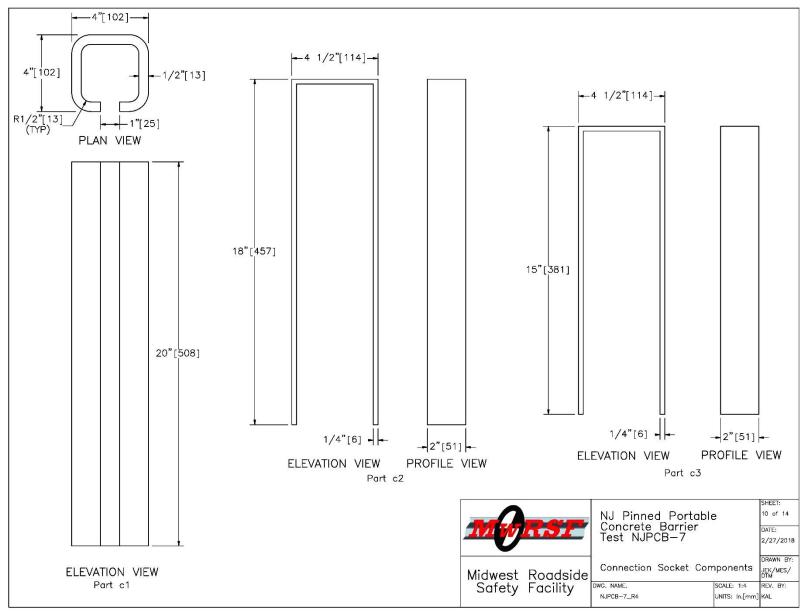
PCB Connection Socket Component Details, Test No. NJPCB-7
